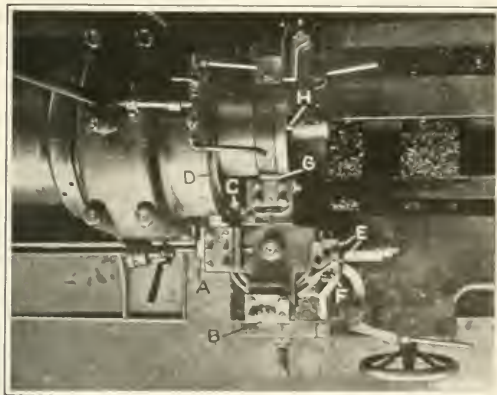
Close View of Tools used on Machine shown in Fig. 9
